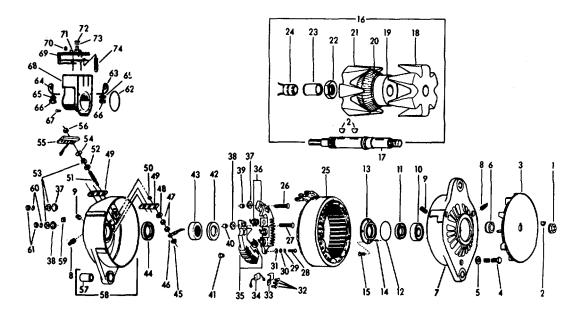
EXPLODED VIEW OF ALTERNATOR
